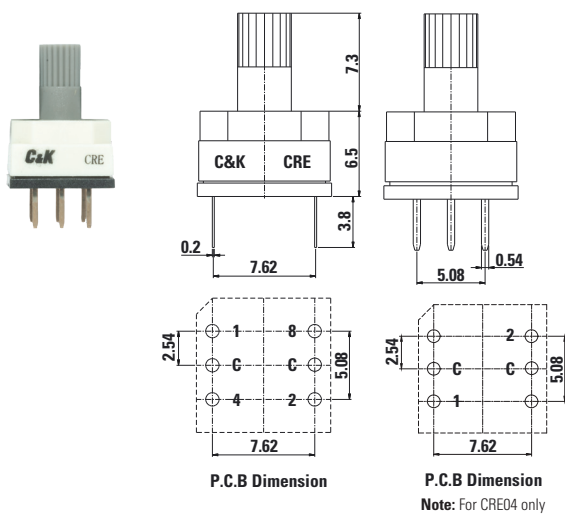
shows the dimensions of the C&K CRE module. The top view shows a rectangular module with a width of 12.00 mm and a height of 6.80 mm. The side view shows a height of 6.50 mm and a width of 5.08 mm. The bottom view shows a width of 14.60 mm and a height of 5.08 mm. The module is labeled 'C&K CRE'.
